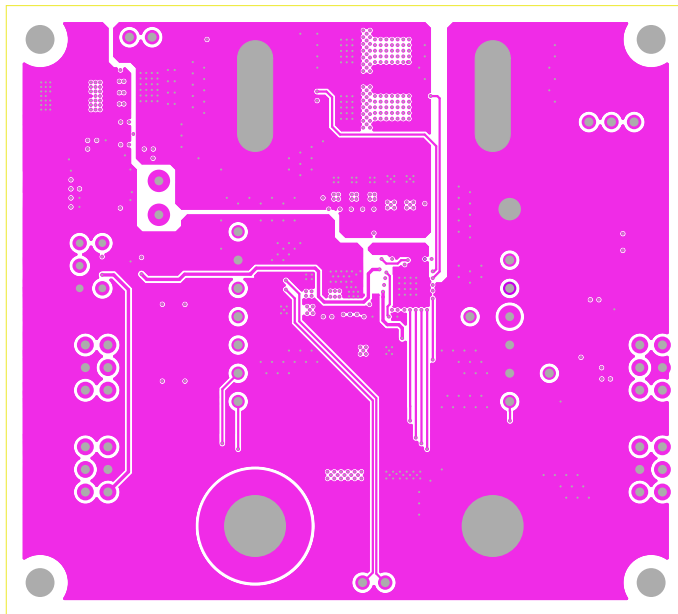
PCB - Inner Layer - Layer 5 (Top View)
